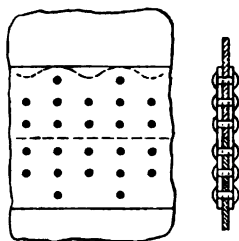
Treble-riveted butt-joint, with double cover-plates.
